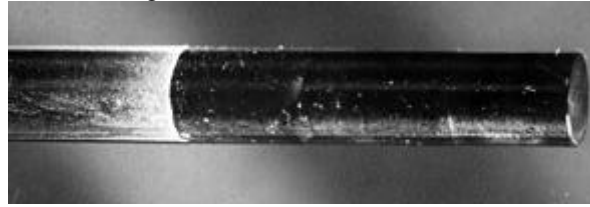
Magnetic Particle Indication at the Weld between a Soft and a Hard Steel Rod
